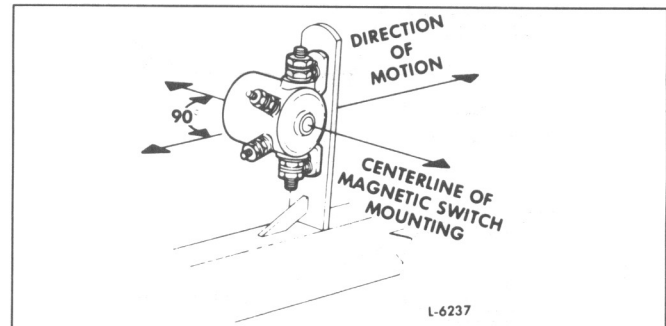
Starter Auxiliary Magnetic Switch Mounting
